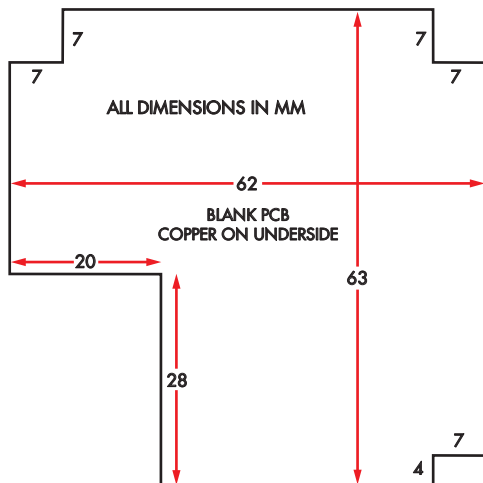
this diagram shows the dimensions of the blank shield PCB.
